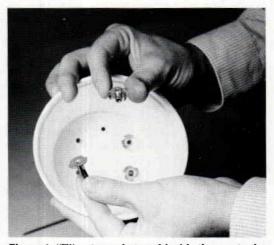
"T" nuts are fastened inside the cup to the machine screws.
